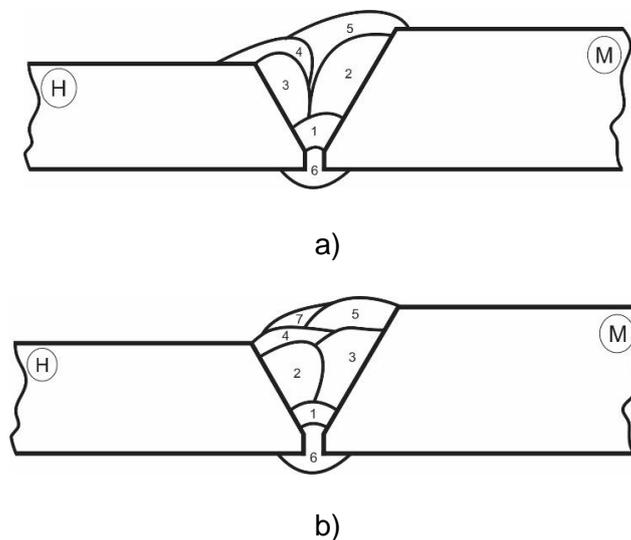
Welded joint layout diagram for plates 1 and 2:
